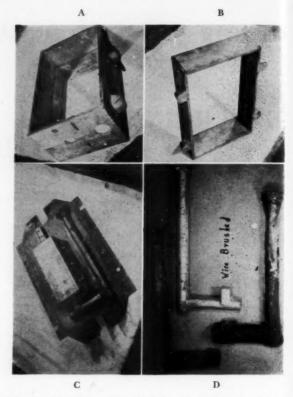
(A) Flask; (B) Flask Pattern; (C) Aluminum Pattern; (D) Sprues, Aluminum and Brass.
